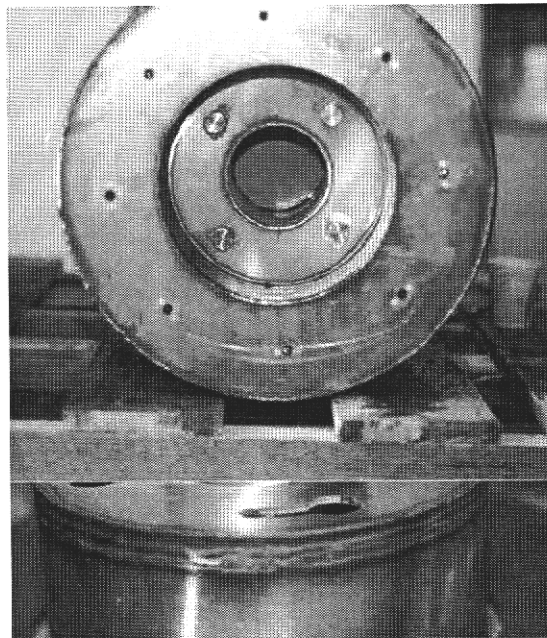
PMATP-EO1 Welded End Plug.
